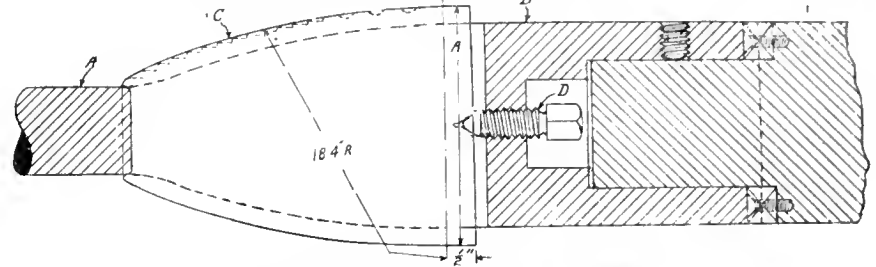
DETACHABLE BORING HEAD WITH FORMED CUTTER.
